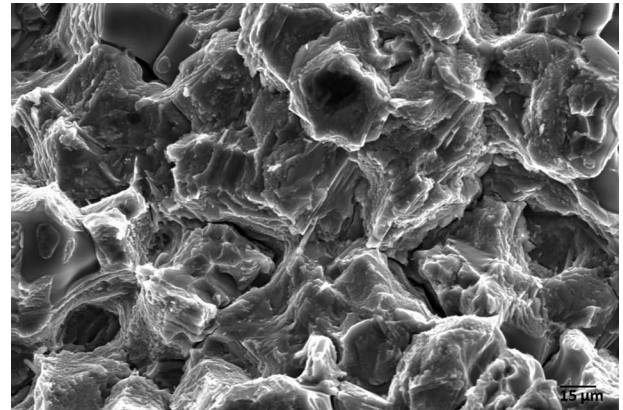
Higher magnified image of the specimen shown in Fig. 134
